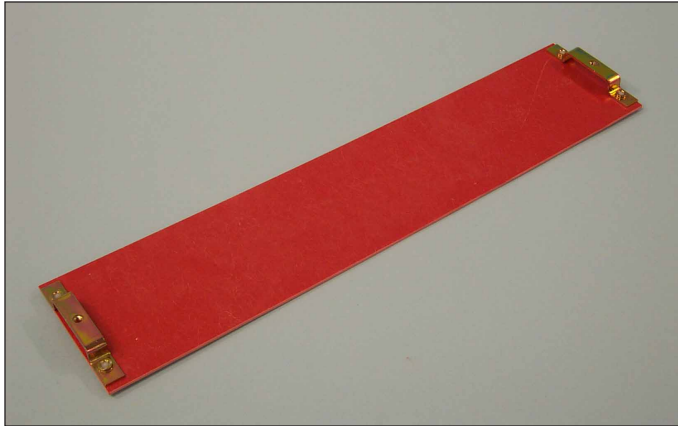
Mounting Brackets Installed on the Bottom Aux. CT Module Insulation Barrier.
